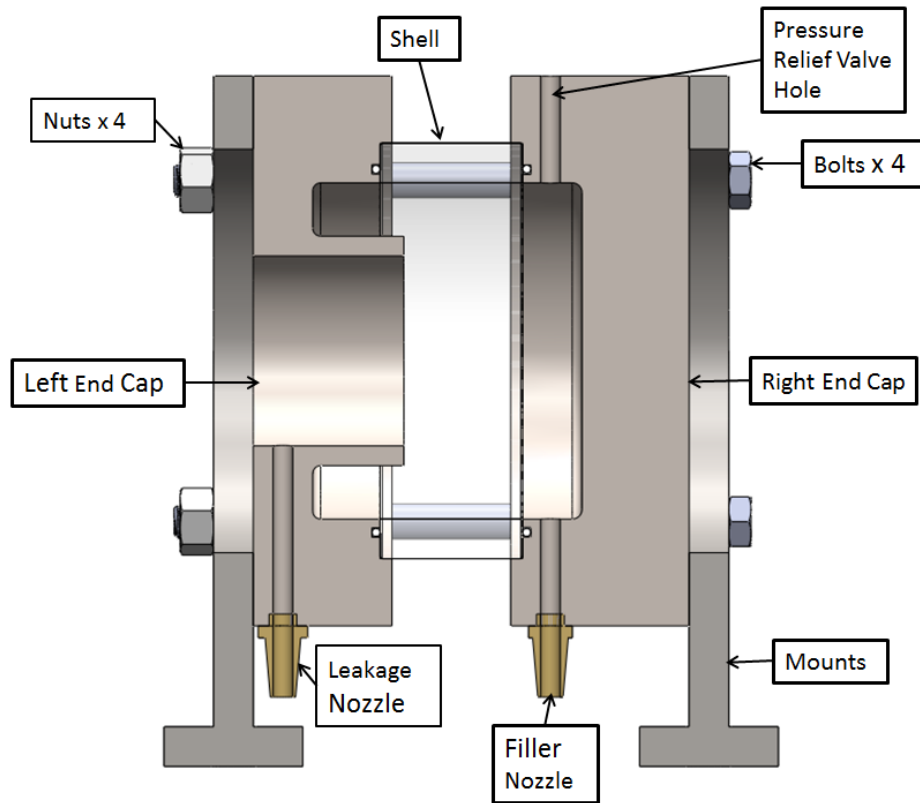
Section View of the Pressure Vessel System. Left refers to motor side; right refers to camera side.
